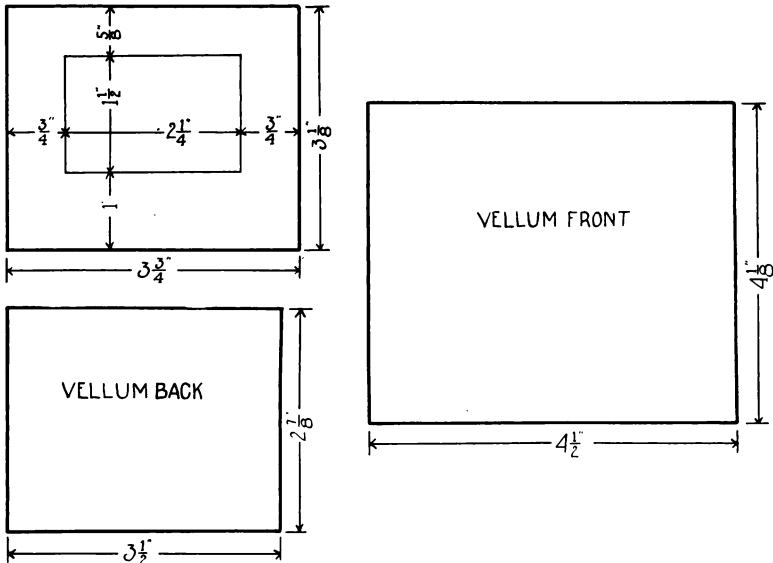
PLATE X. The completed mount showing the location of the calendar, and the two pieces of vellum.
